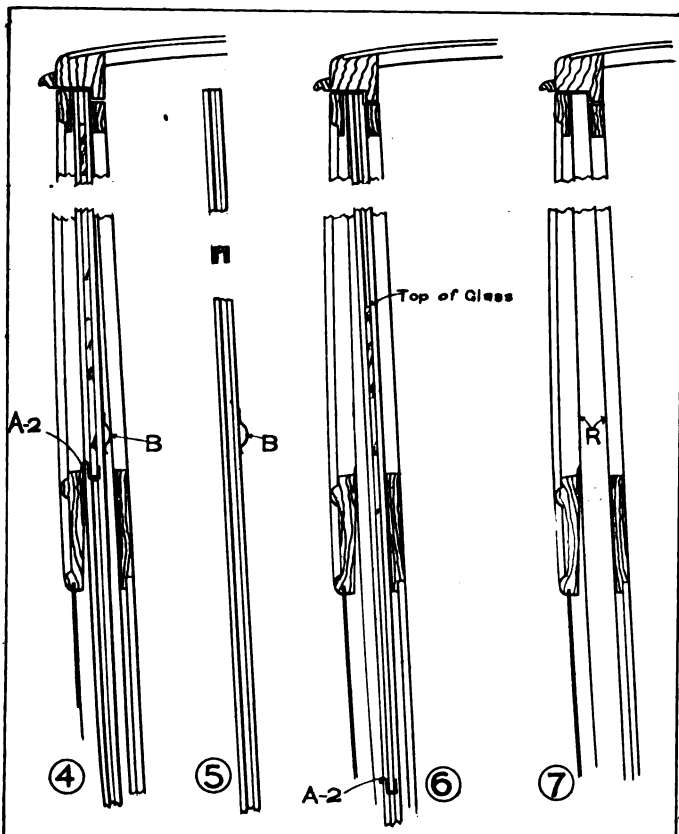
Showing channel hook that supports glass. Fig. 5—Section of slide channel. Fig. 6—Illustrating operation of lowering glass. Fig. 7—Pillar without channel in position
